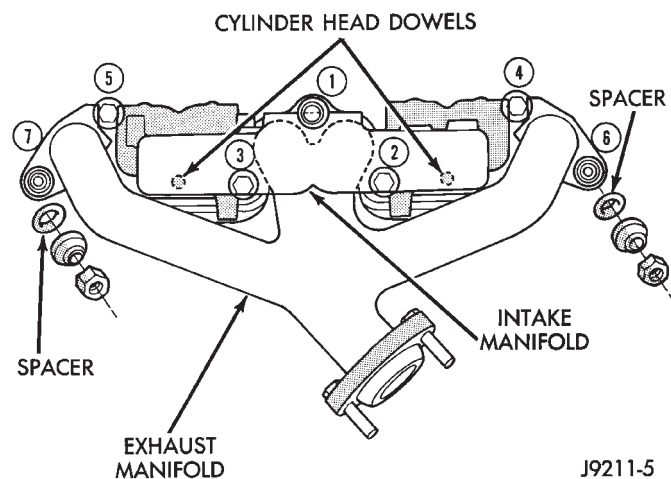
Intake/Engine Exhaust Manifold Installation (2.5L Engine)
